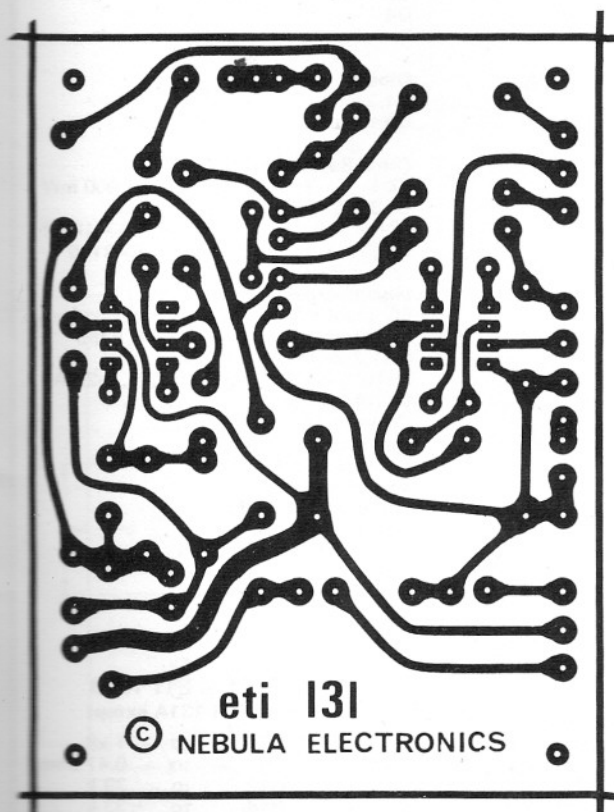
Printed-circuit board layout for the power supply. Full size 100 x 75 mm.
